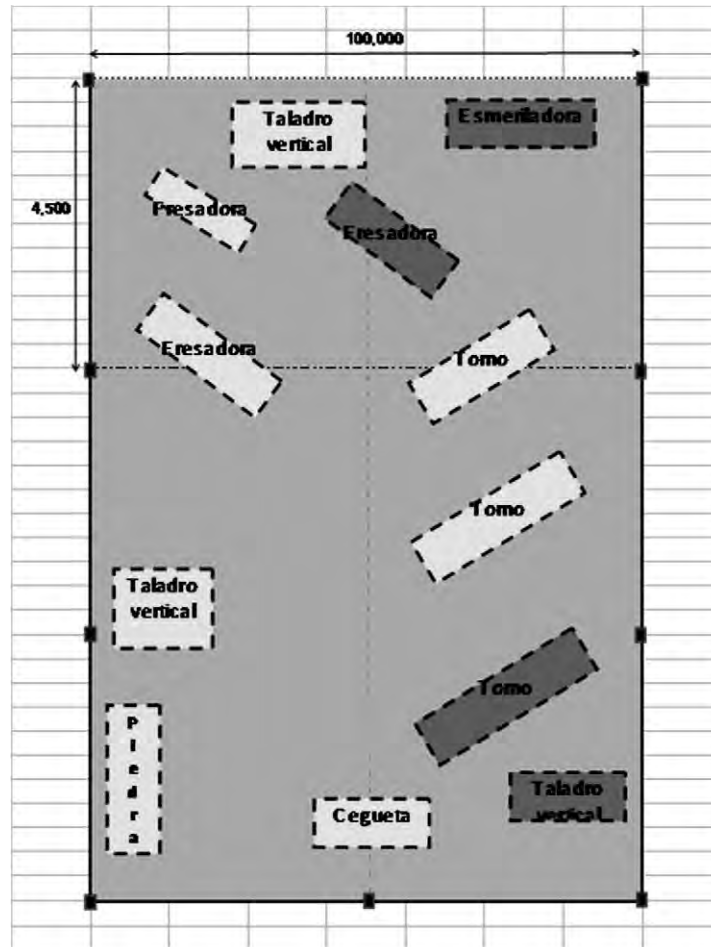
Exact Location of Machine Tools (Unit: mm)
